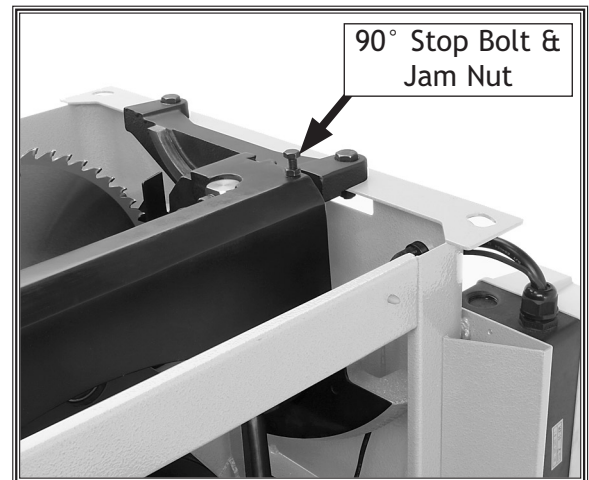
90° stop bolt and jam nut (table removed for clarity).
